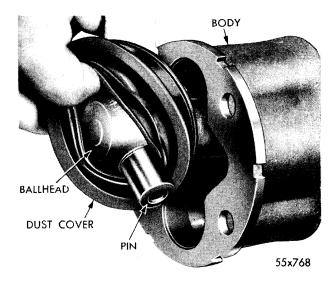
Sliding Dust Cover over Ball Head and Pin
